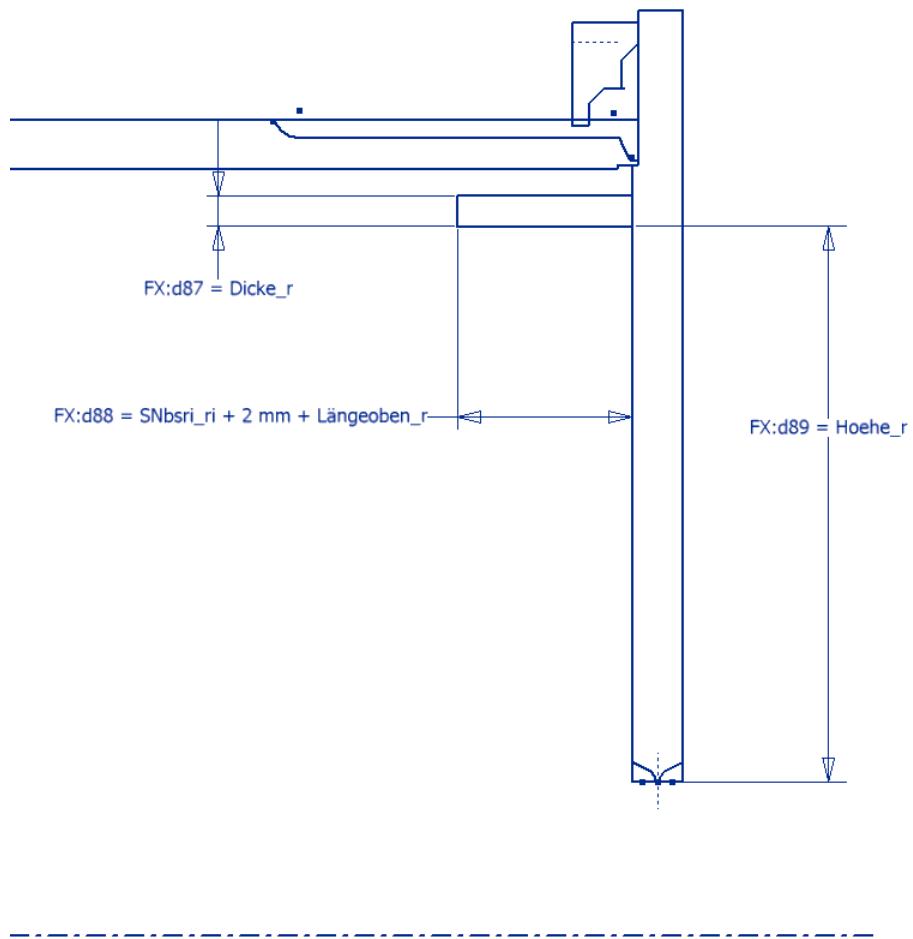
Welding seam preparation and lowering of drum thickness to real size
